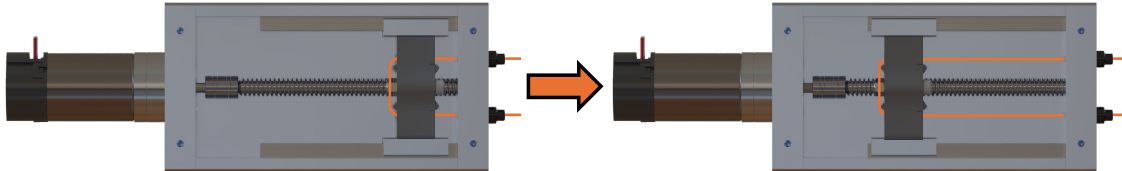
The back-mounted linear actuator. Using a lead screw and nut, the brushed DC motor driven actuator retracts a 3D printed block which holds the cable that runs through the entire CASET system.
